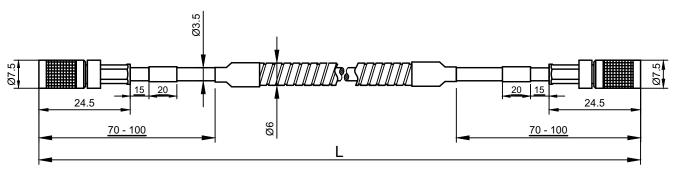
Dimensions of connection cable ds82x.ec102 (steel protection) mechanical reinforcement
